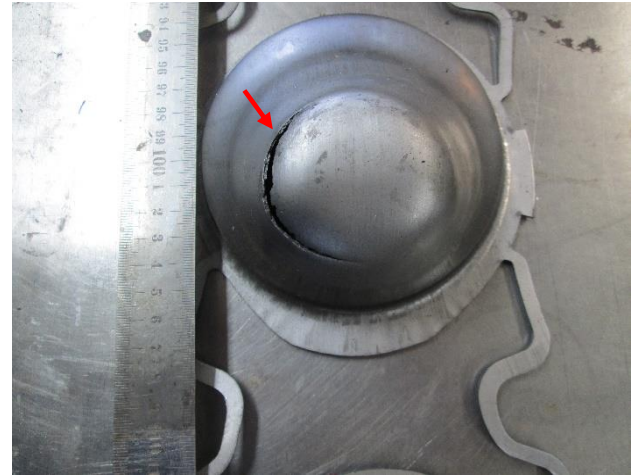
Cracked component in second deep drawing step. It is observed that the crack is located in the inner radius
